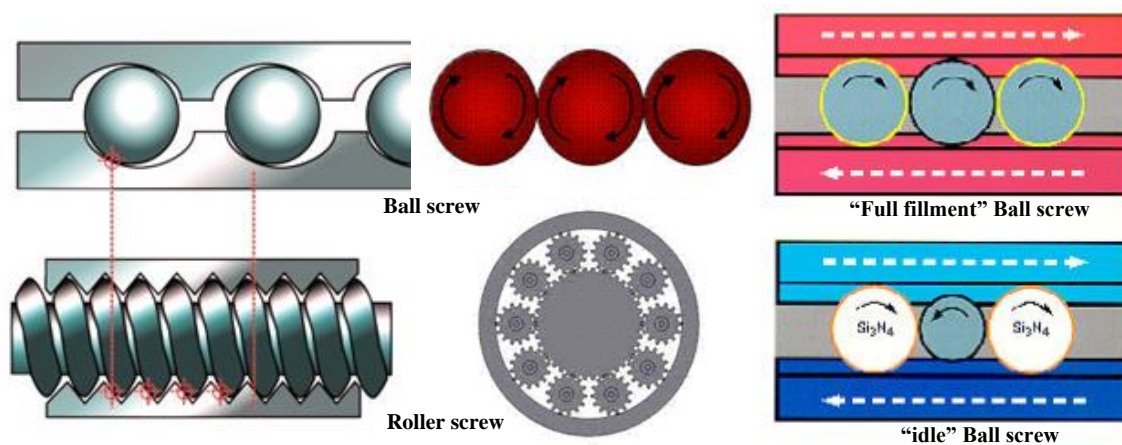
Design comparison of ball screw and roller screw [3, 4]
